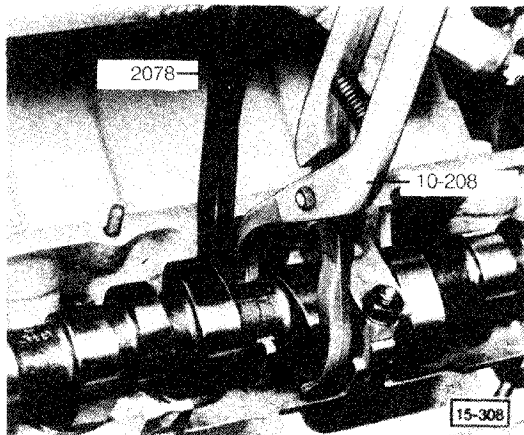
Adjusting disc being removed from cylinder head. Volkswagen tool no. 2078 is used to depress cam followers. Tool no. 10-208 is used to remove adjusting disc.
